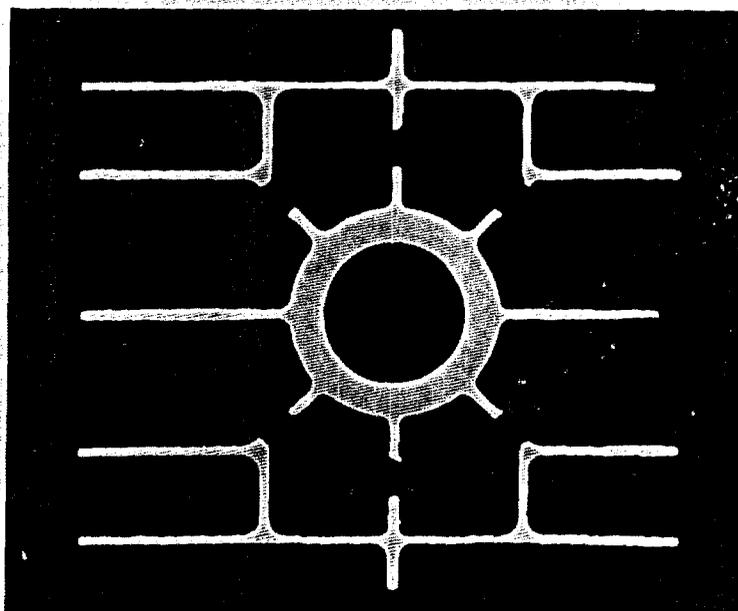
CT image of the flap control unit housing for dimensional measurements.
